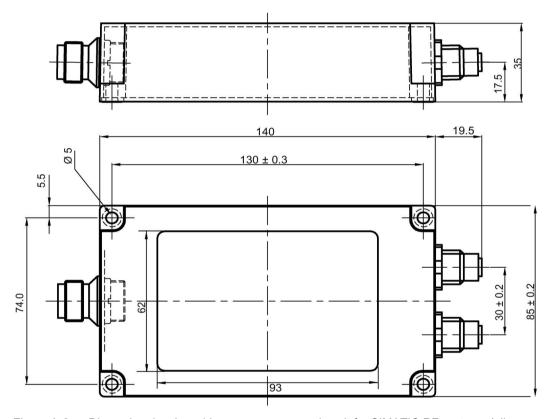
Dimension drawing wide-range power supply unit for SIMATIC RF systems (all dimensions in mm)
